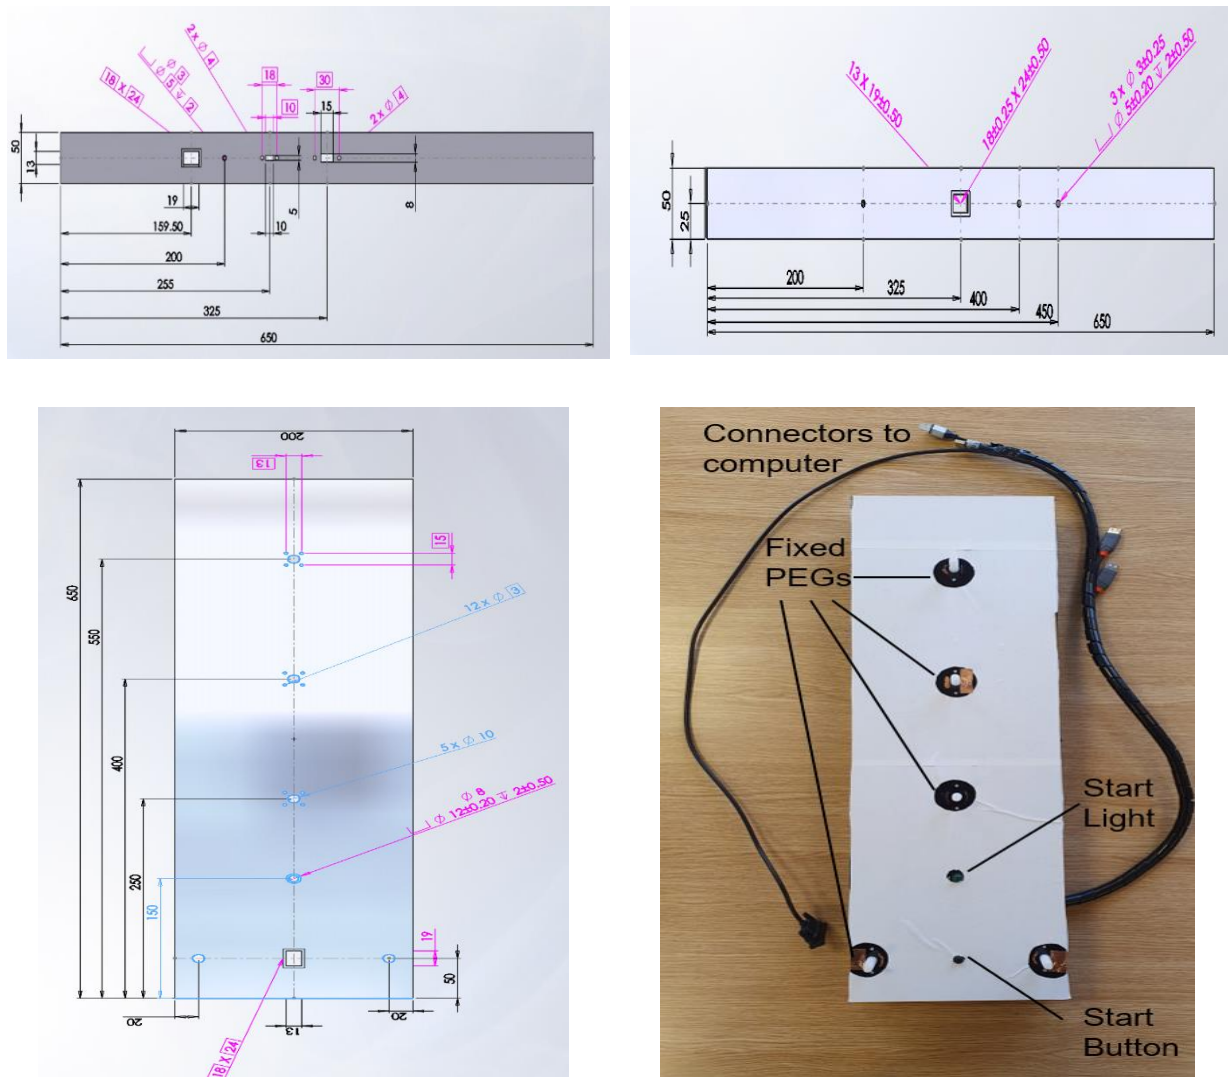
SolidWorks design for Event detection kit a) Right side b) Left side c) Top view d) EDT after fabrication. EDT allows movement across the board with either hand and can be connected to an external display.
